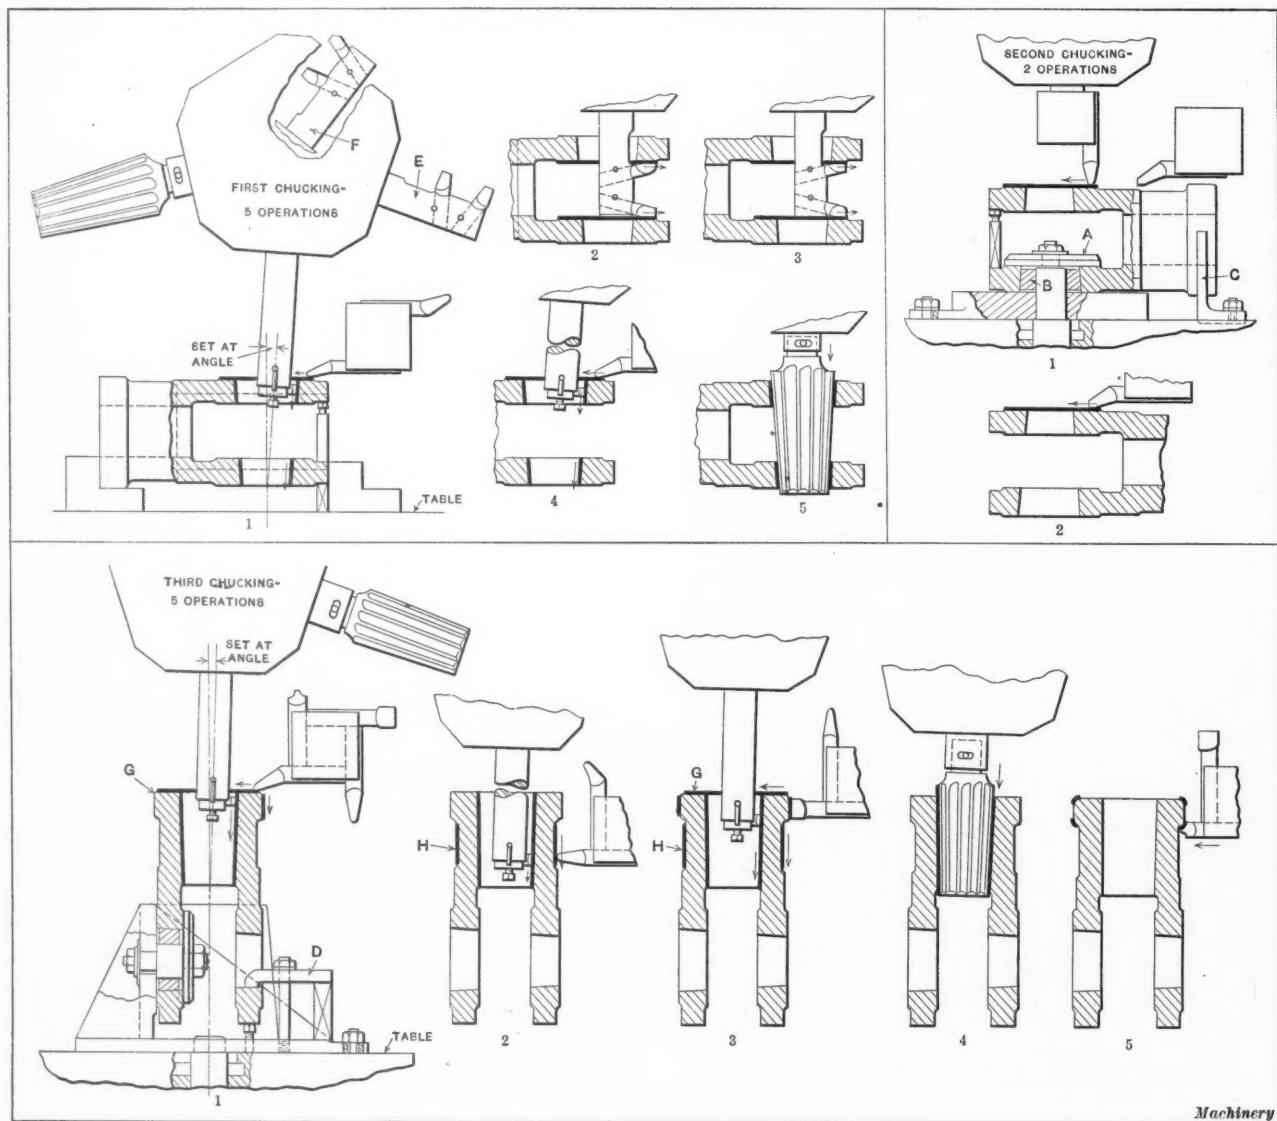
Machining a Locomotive Cross-head in Three Chuckings on the Vertical Turret Lathe
